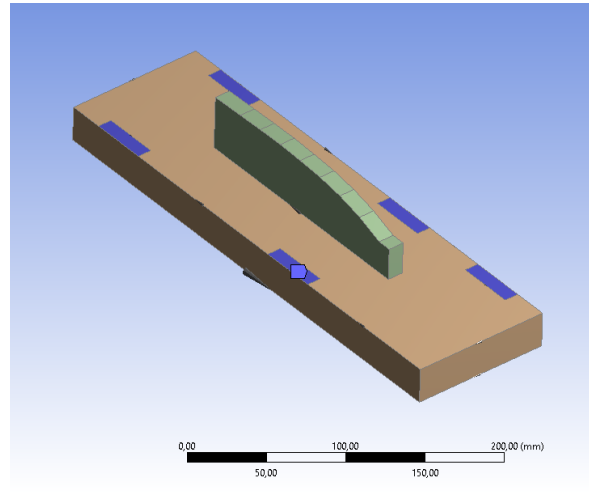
The pupal area illustrate the are the clamps hold the part fixed during welding.
